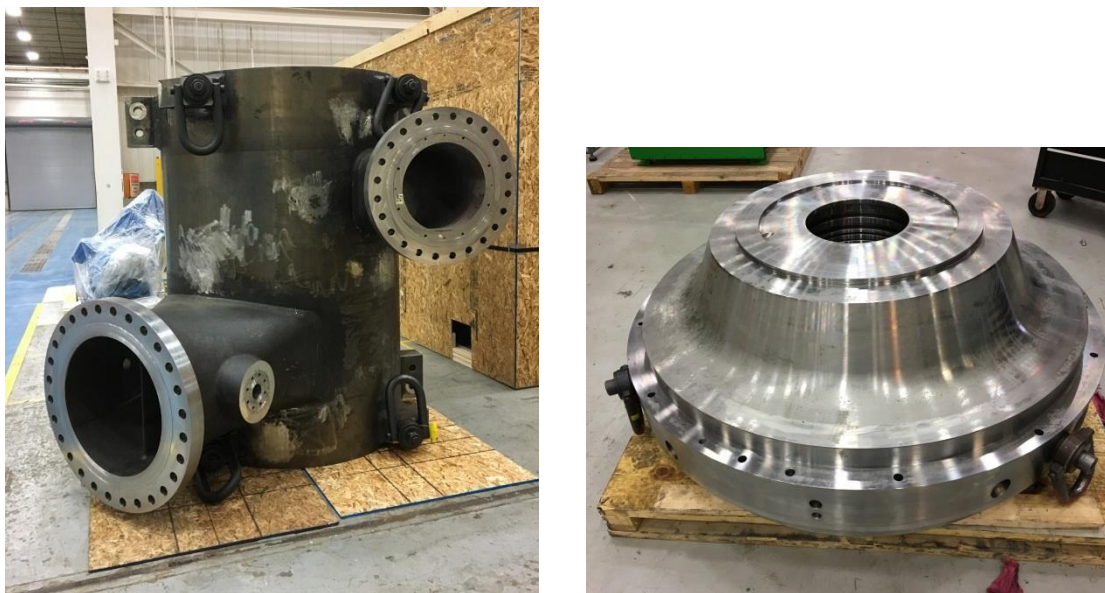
Pressure Case and Drive End Head as Received from Supplier
